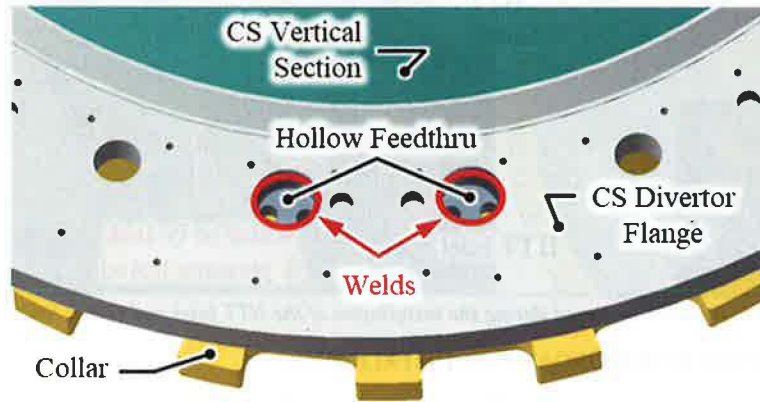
Welds between the HTP feedthrus and the casing flange to be tested
